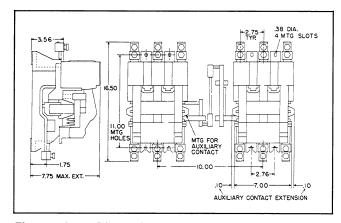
A211 Dimension Drawing (Dim. in inches)
